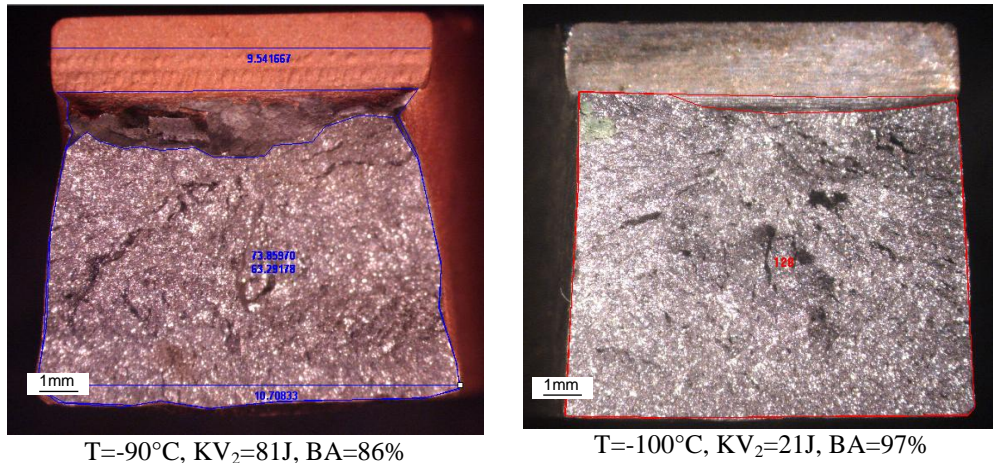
X65 steel: fracture surfaces for charged specimen at different temperatures
